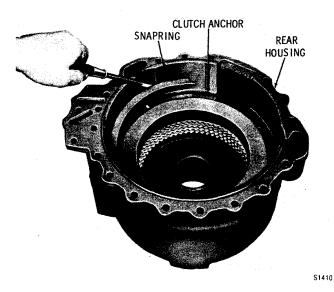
Installing clutch anchor snapring (TRT-1)
